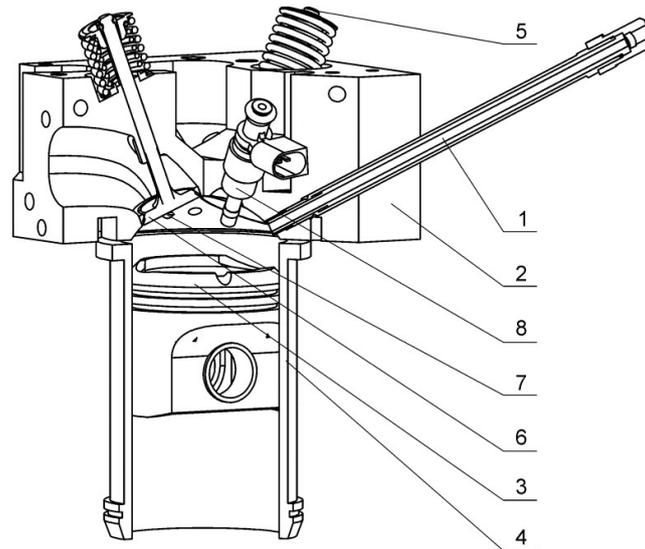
Cross-section of the research engine combustion chamber; 1 – optical-fiber sensor, 2 – engine head, 3 – piston, 4 – cylinder liner, 5 – intake valve, 6 – exhaust valve, 7 – spark plug, 8 – fuel injector.
